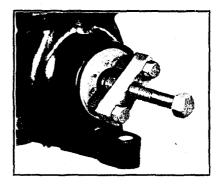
Removing Generator Driving Clutch with Puller 83227
